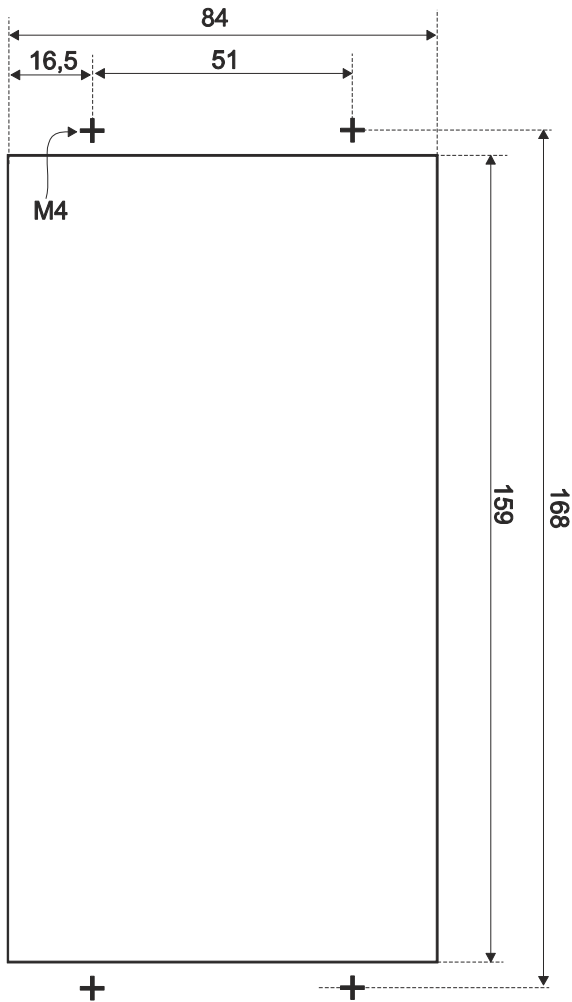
AQ110P cut out for panel mounting, scaling in millimeter.
